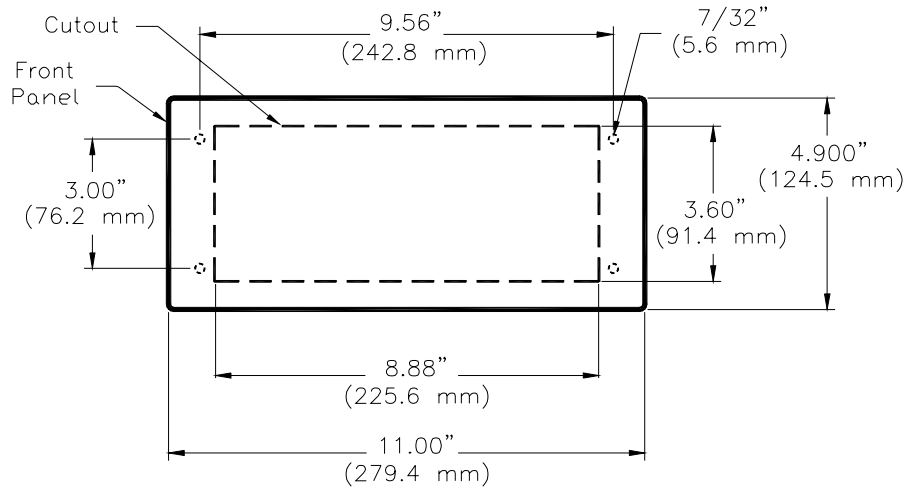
SEL-551 Relay Dimensions and Drill Plan for Single Rack-Mount Relay
